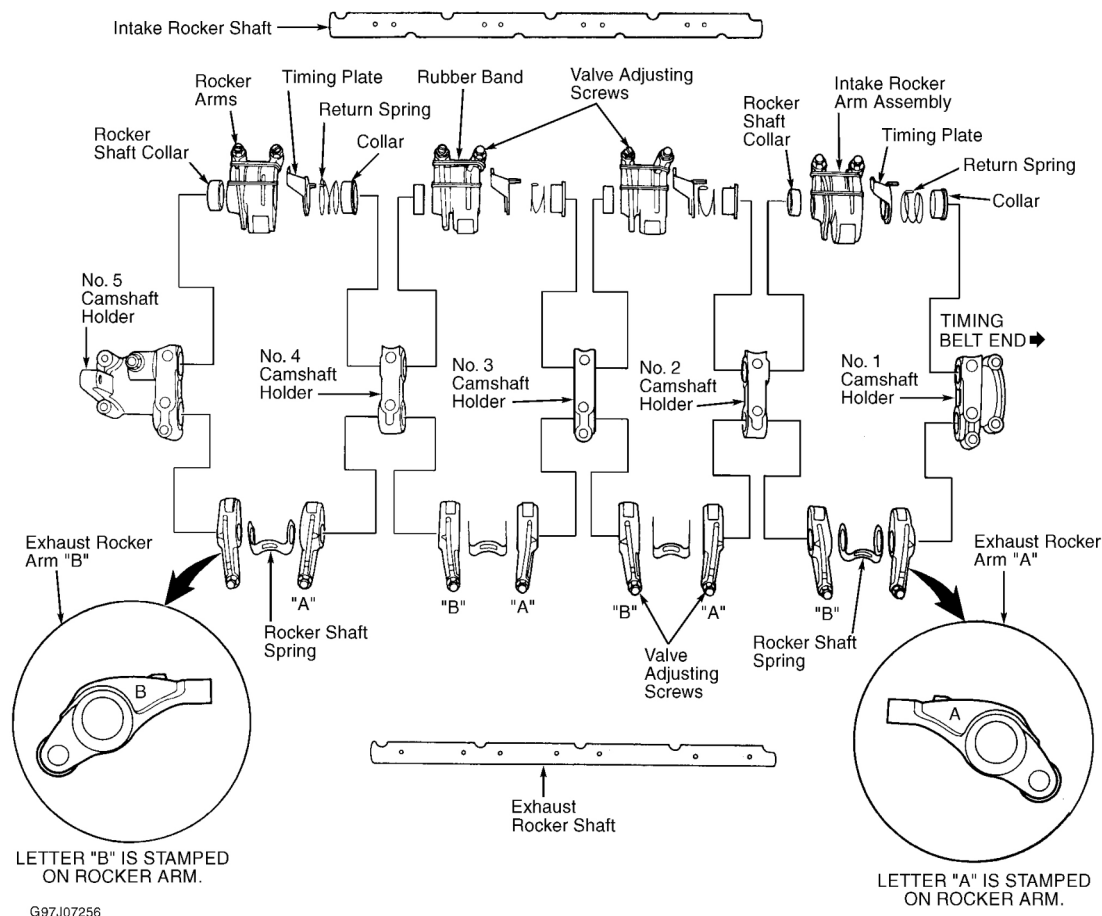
Identifying Rocker Arm Assembly (D16Y5 Engine - VTEC-E)
